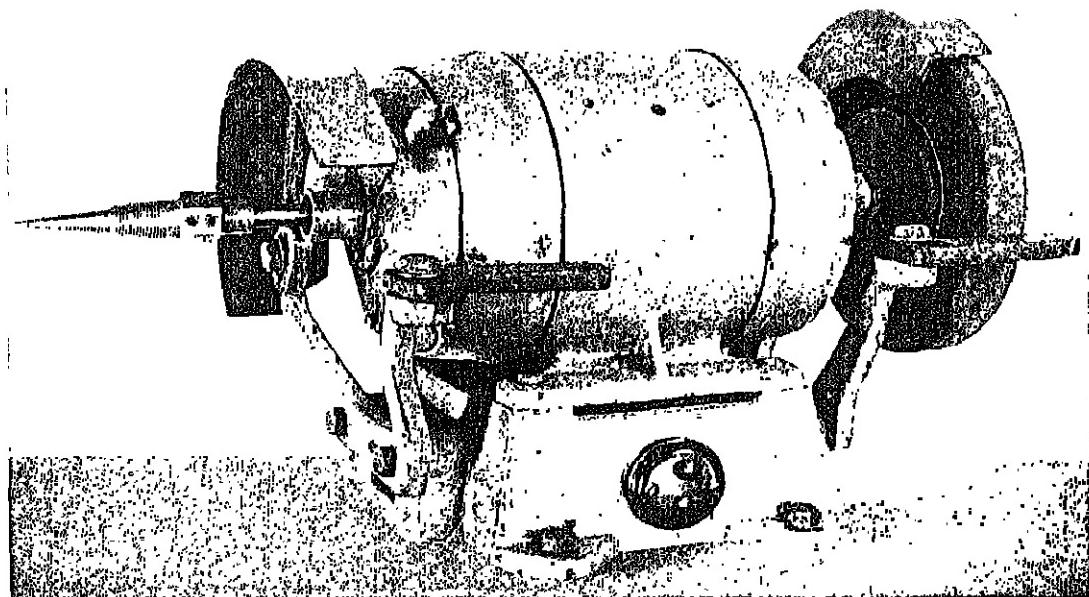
ELECTRIC GRINDING AND POLISHING MACHINE
